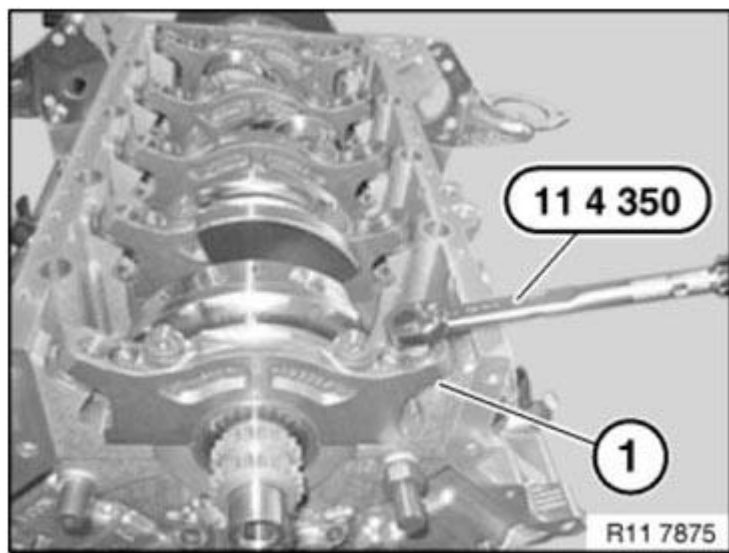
Securing All Threaded Support Sleeves With Special Tool 11 4 350
